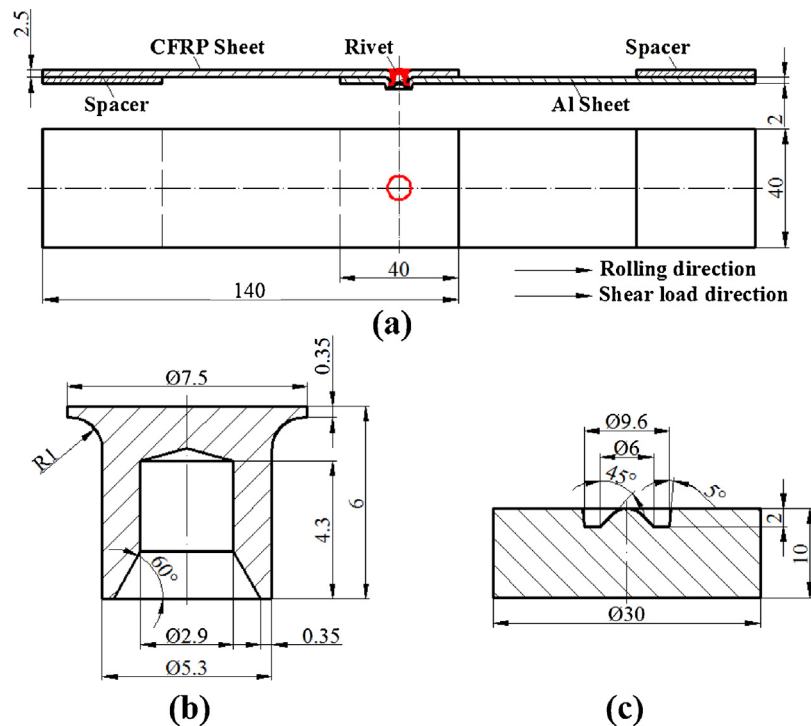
Geometry dimensions on the riveted specimen, rivet and rivet die (dimensions in mm): (a) the SPR specimen for tensile-shear tests, (b) the rivet and (c) the die.
